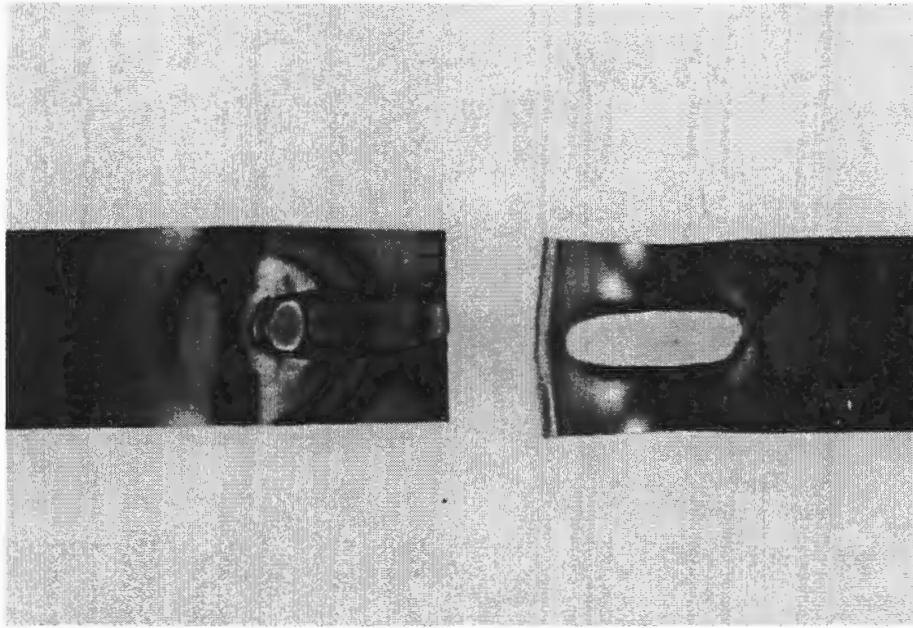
Typical failure of a plug weld peel specimen welded under improved conditions. Failure occurred by metal tearing initiated within the heat-affected zone; magnified 1 $\times$ .
